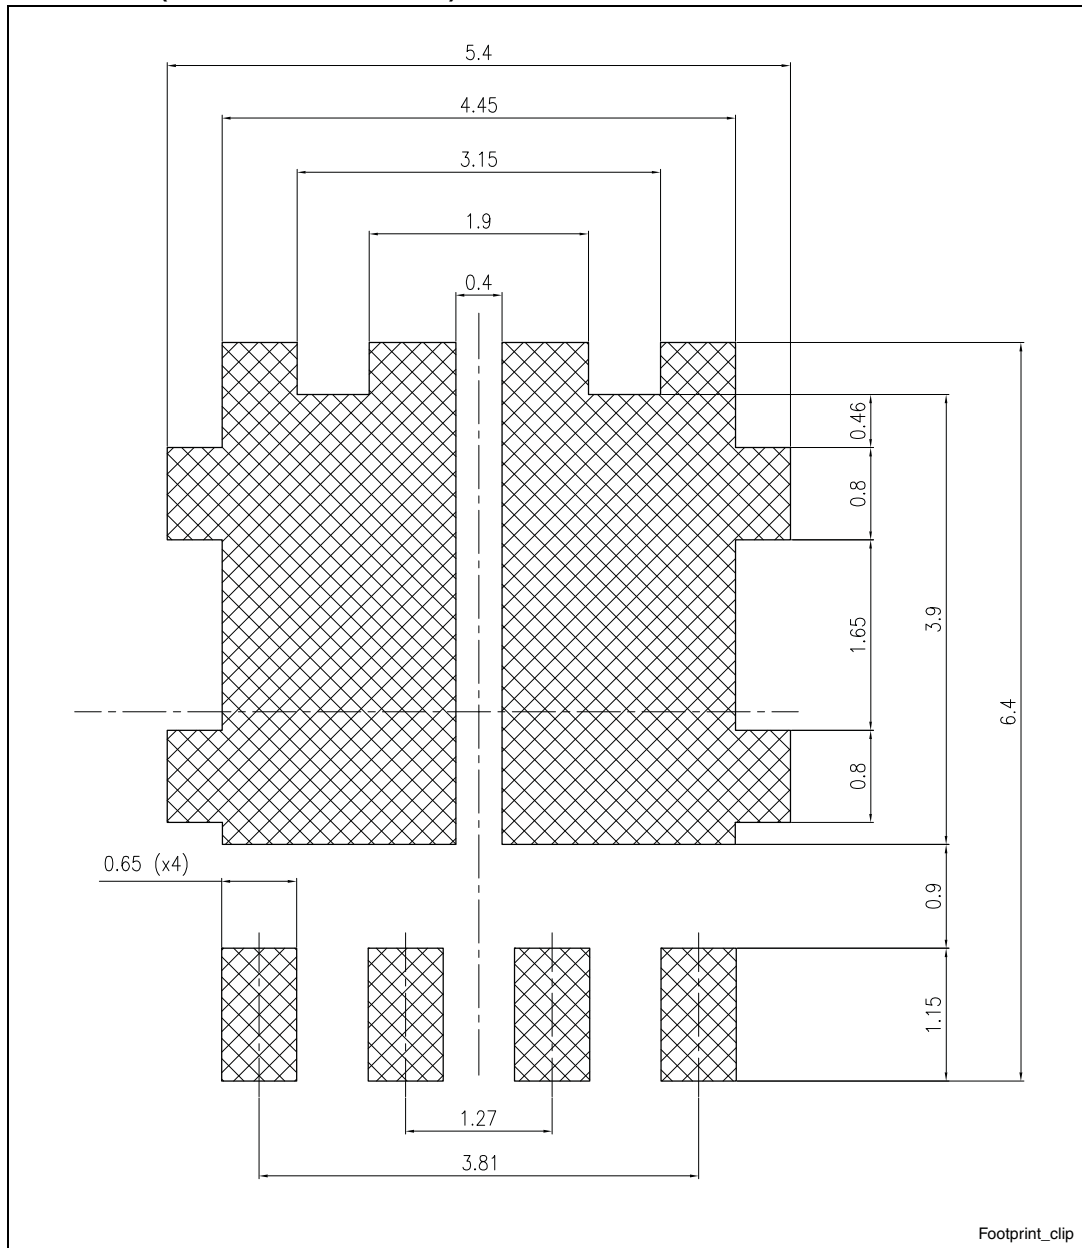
PowerFLAT™ 5x6 double island (clip) drawing recommended footprint (dimensions are in mm)
